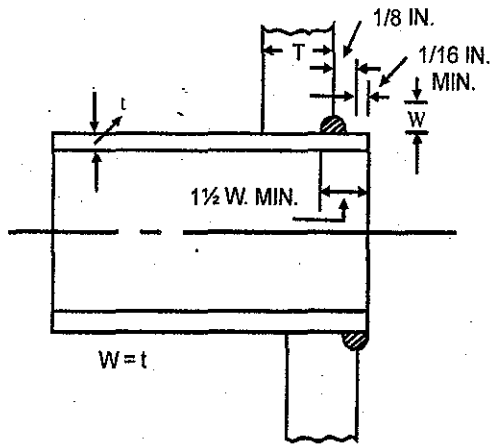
TUBES TO BE LIGHTLY EXPANDED INTO THE PLATE BEFORE WELDING
